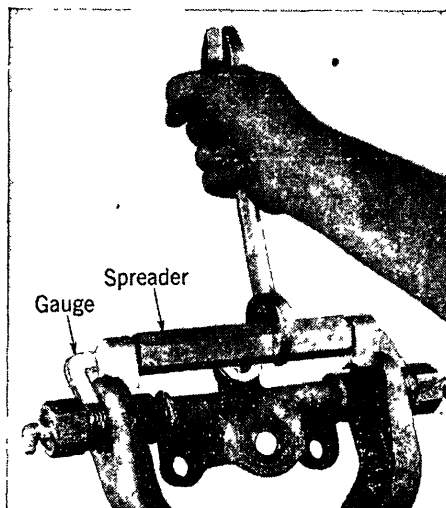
Assembling upper control arm (pressed steel type), 1942-52
